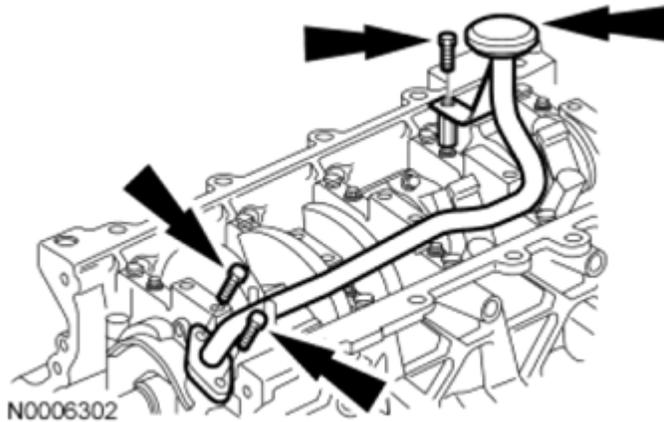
Locating Oil Pump Screen And Pickup Tube And Bolts
